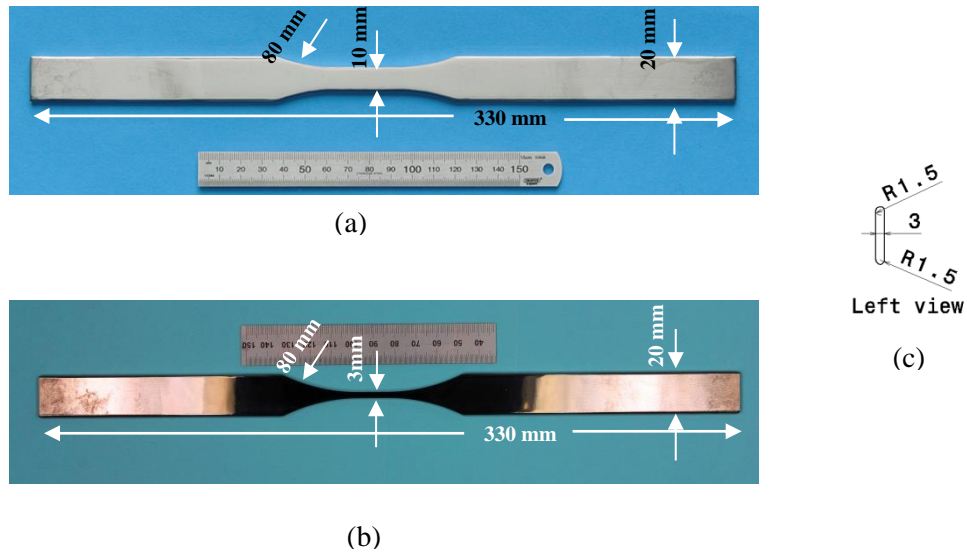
(a) Smooth corrosion fatigue test specimen, (b) Pre-pitted corrosion fatigue test specimen, (c) side view of specimens showing the size of the fillet.
